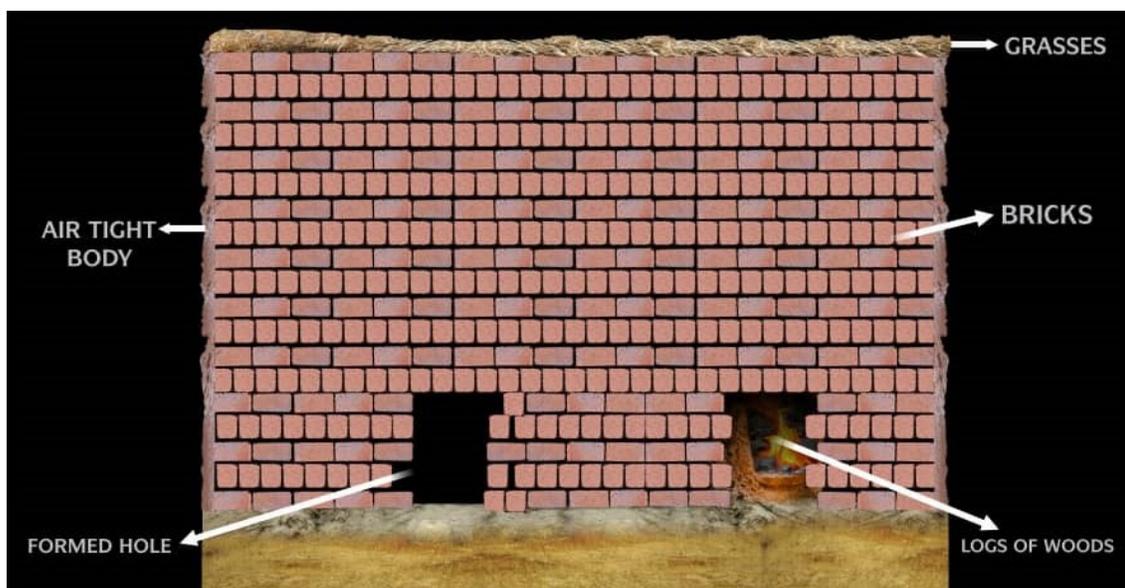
Cross-section of Final Kiln for Baking Burnt Bricks
